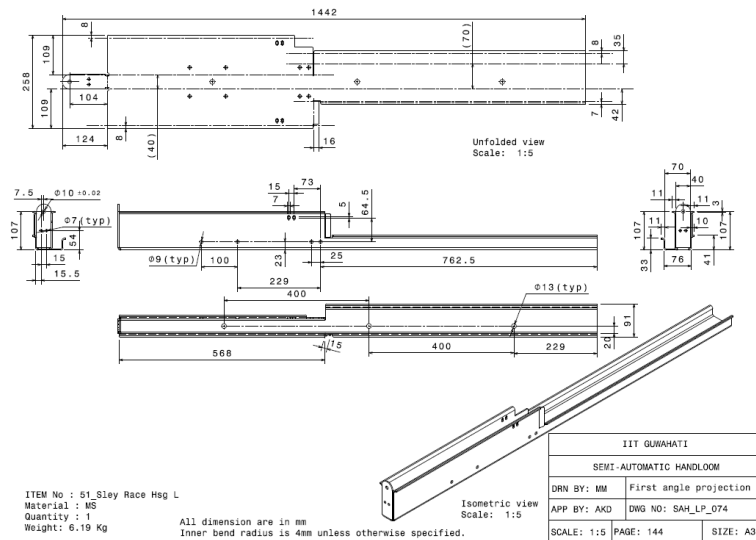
Example of manufacturing drawing of a sheet metal part
